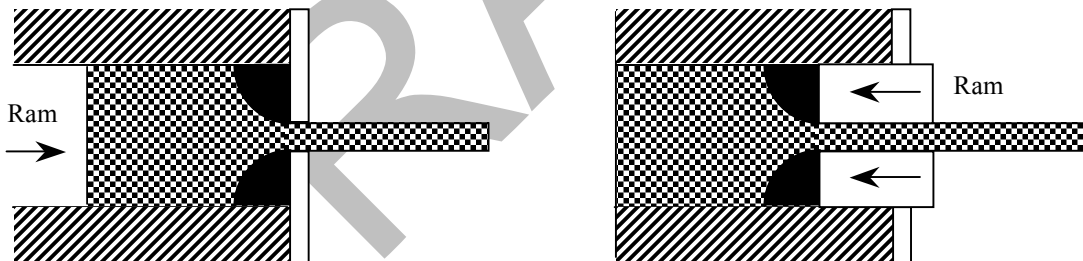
Direct extrusion is shown to the left and to the right is indirect extrusion.
